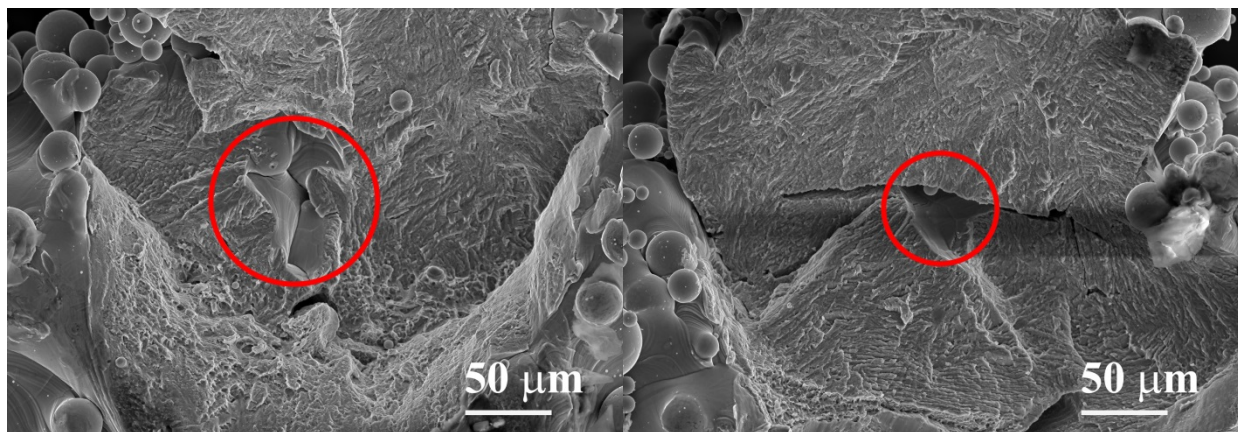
Fatigue fracture morphology of the struts in selective laser melted (a) Co-Cr and (b) Ti-6Al-4V porous structure. Fatigue fracture surfaces are indicated by red arrows.
